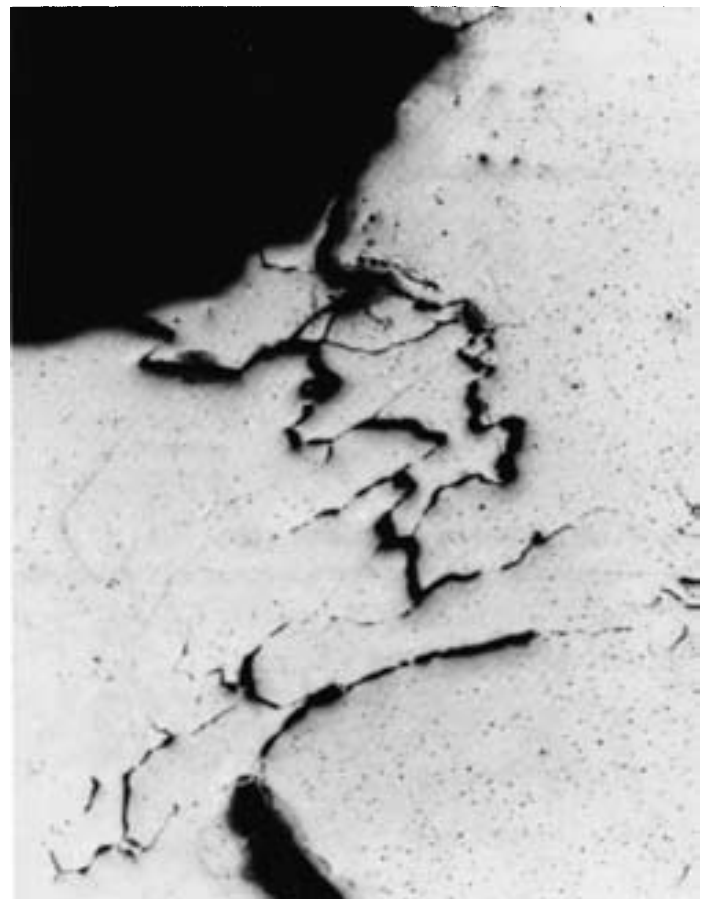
Cracks in weld metal at strongly Fe-alloyed locations in Monel weld metal with a 1.3 % Mn content. (100x)
